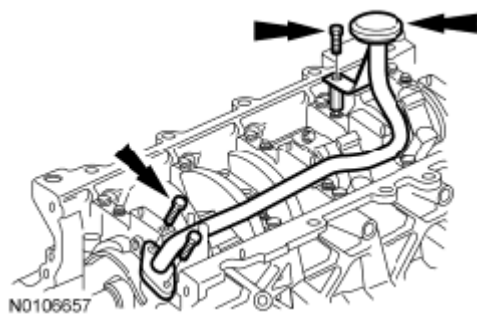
Identifying Oil Pump Screen, Pickup Tube And Tube
